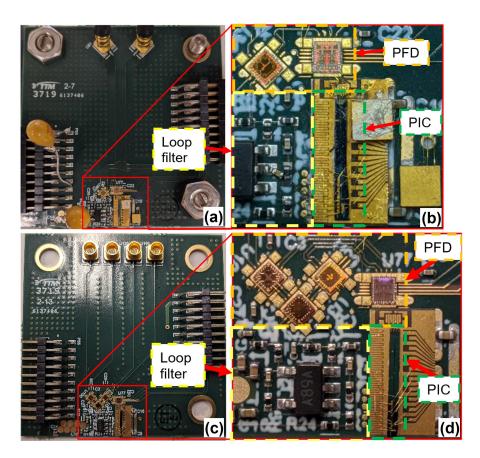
(a) An overview of the single-ended assembly with (b) a close view of the major components. (c) An overview of the differential assembly with (d) a close view of the major components.
